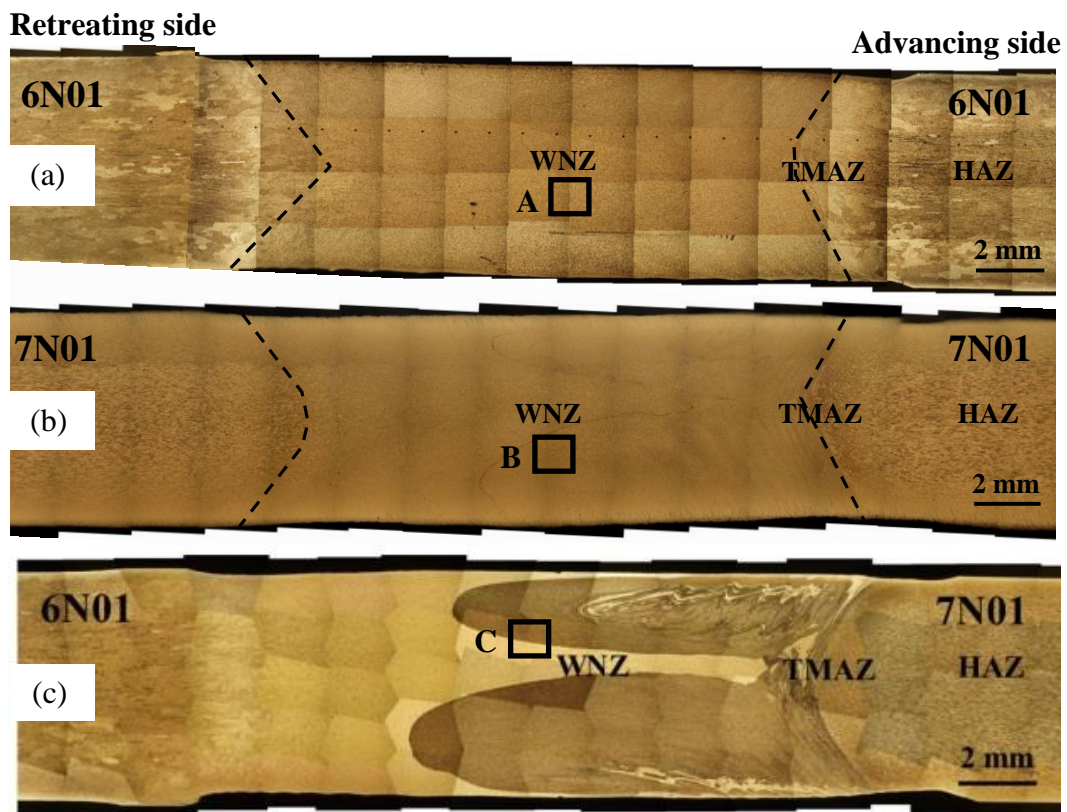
Welded structure in transverse cross-section of (a) 6N01, (b) 7N01 and (c) 6N01-7N01 FSWed joints.
